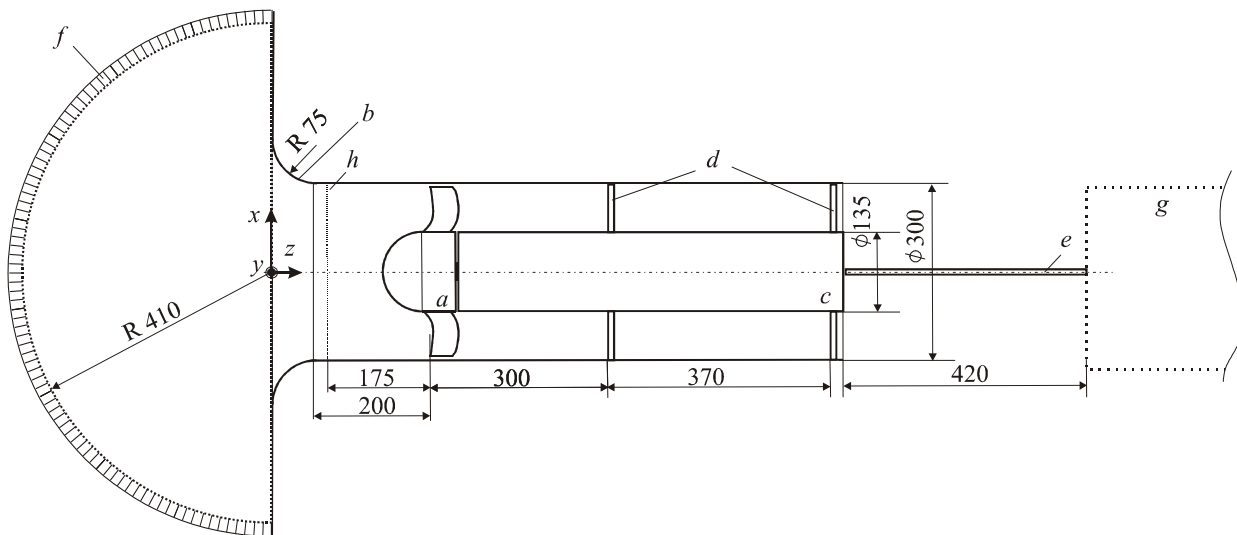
Fan assembly; (a) impeller "USI 7" with hemispherical spinner, (b) bell mouth inlet nozzle, (c) bearing and electric drive, (d) two sets of three cylindrical struts (threaded rods M8, equally spaced on circumference), (e) optional external drive shaft (see Fig. 3), (f) hemispherical flow conditioner (HFC), (g) blocked volume by optional external electric motor with integrated torque shaft (see Fig. 3), (h) measuring plane for hot wire inflow measurements
